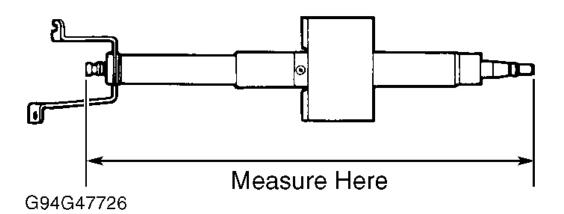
Measuring Steering Shaft Dimensions Courtesy of MAZDA MOTORS CORP.
